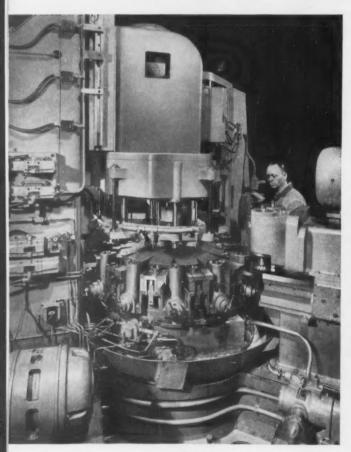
Contact face of cast-iron oil-pump body is roughand finish-milled; two gear pockets are rough- and finish-bored; two shaft holes are drilled, reamed, and chamfered; and four cover screw-holes are drilled, chamfered, and tapped on this machine.
